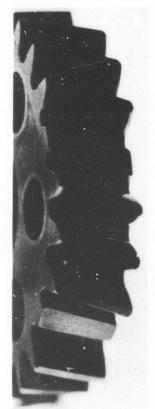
Blacklight Photograph of Test Gear, Showing a Crack Indicated by Fluorescent Penetrant Inspection Across the Helical Involute Surface of a Test Tooth (Magnification: 1×).
